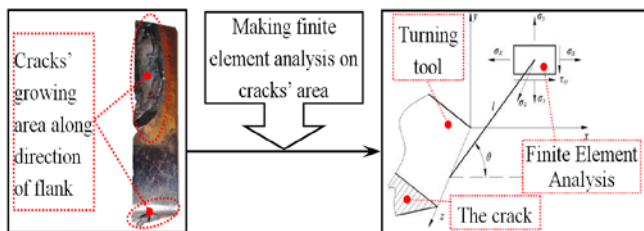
Analysis of shear stress of crack tip on machining region of the cutter
